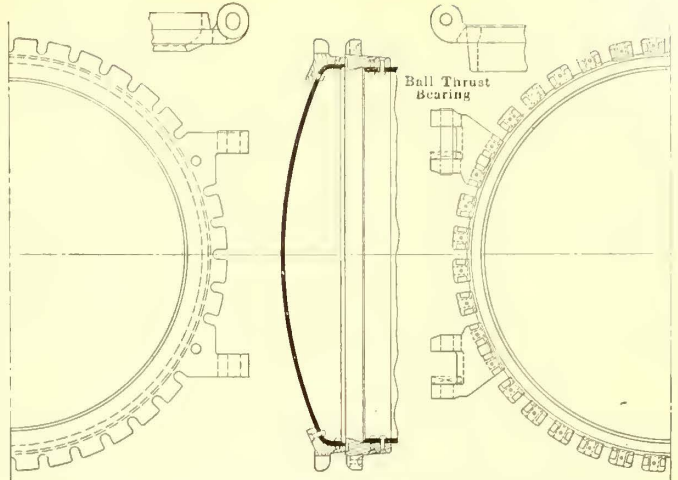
DETAILS OF CREOSOTING CYLINDER DOOR
